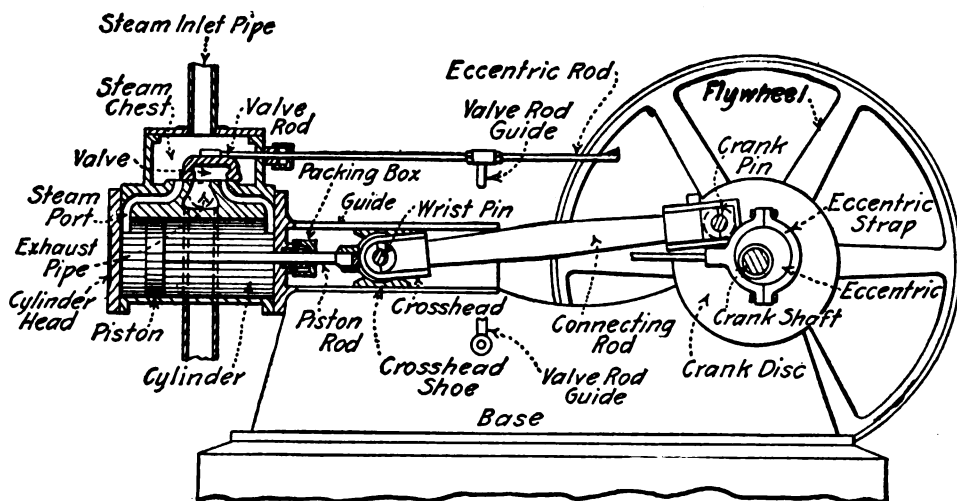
Sectional diagram of a horizontal steam engine with important parts named
